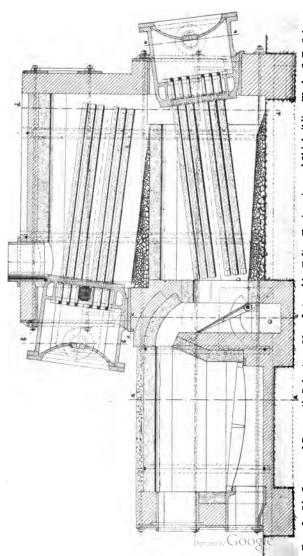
Rix Compound Pneumatic Reheater. Manufactured by Fulton Engineering and Shipbuilding Works, S. F., Cal.
